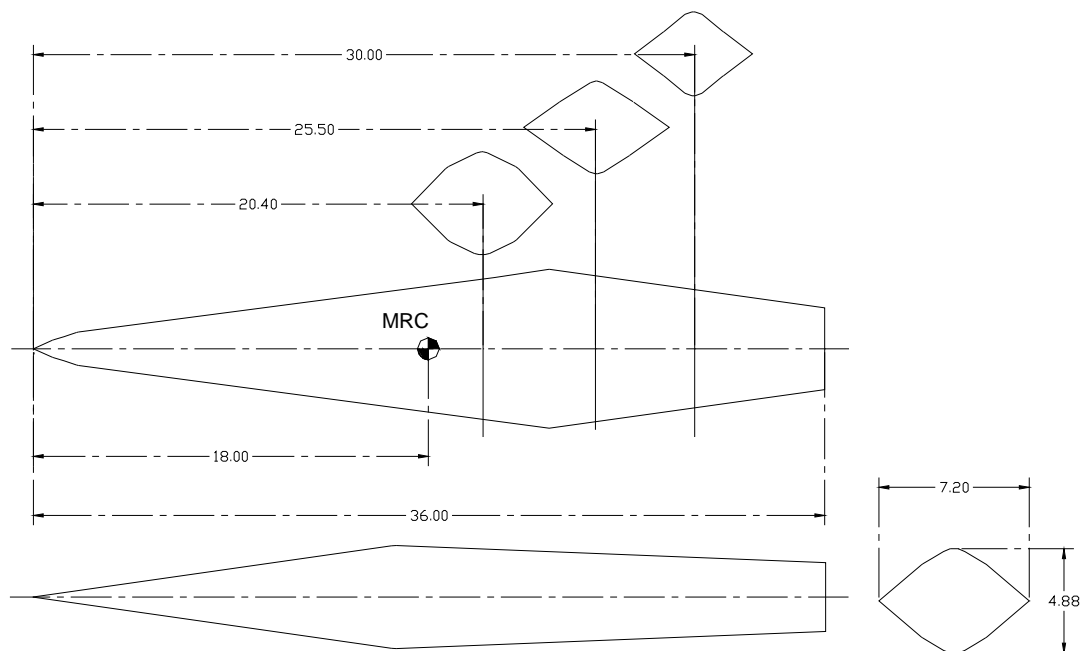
Details of the faceted missile model (all dimensions in inches)
